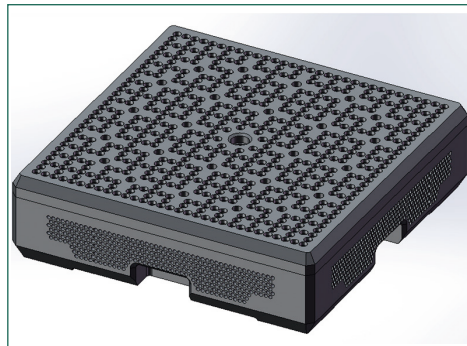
New Conventionally Manufactured DFBN (skirt hole pattern shown is not the final pattern).
